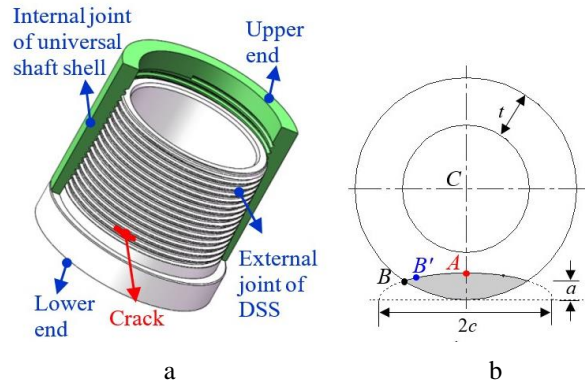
Sketch of the joint of the DSS: a – model of an engaging thread; b – the cracked cross-section
